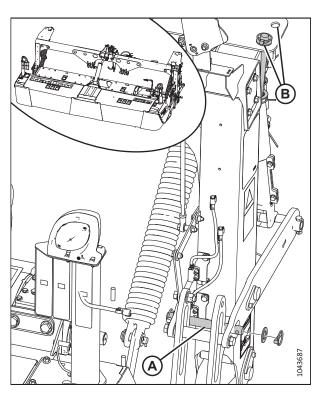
Auxiliary Lift Lock Pins - Left Side
